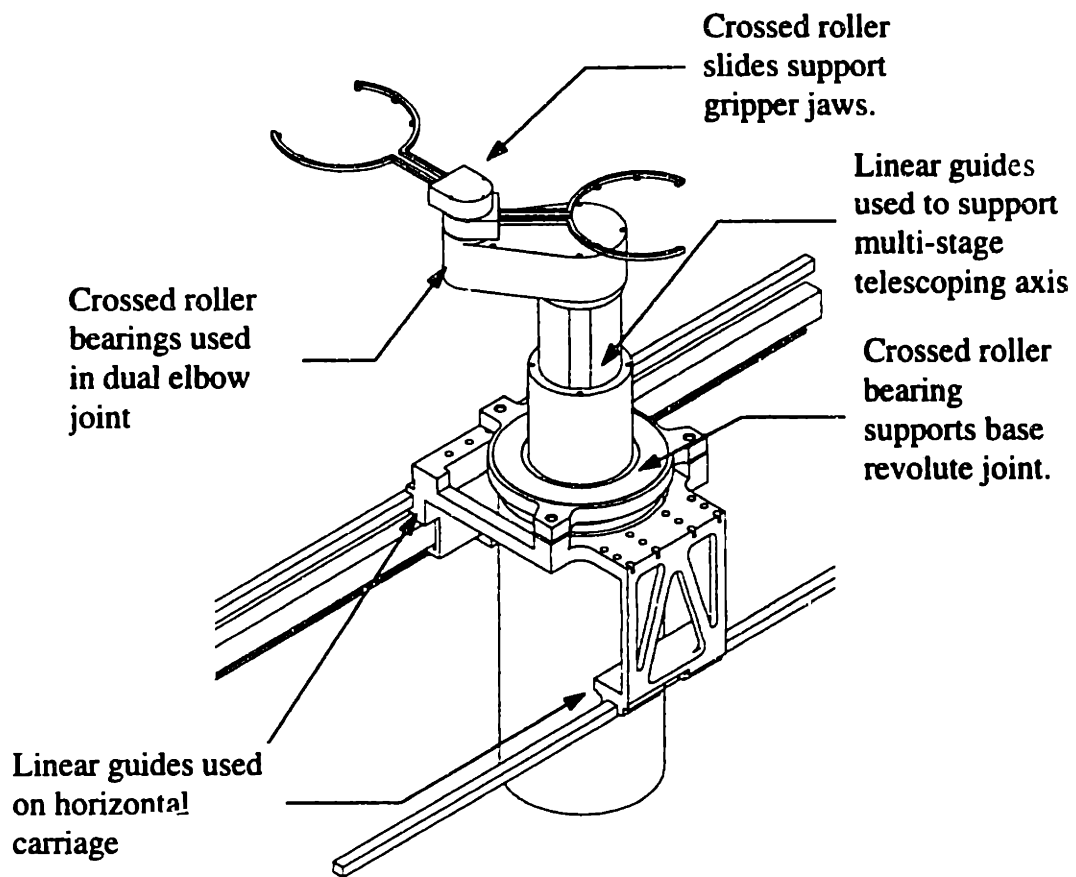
Locations in the wafer handling robot where rolling element bearings are used.
